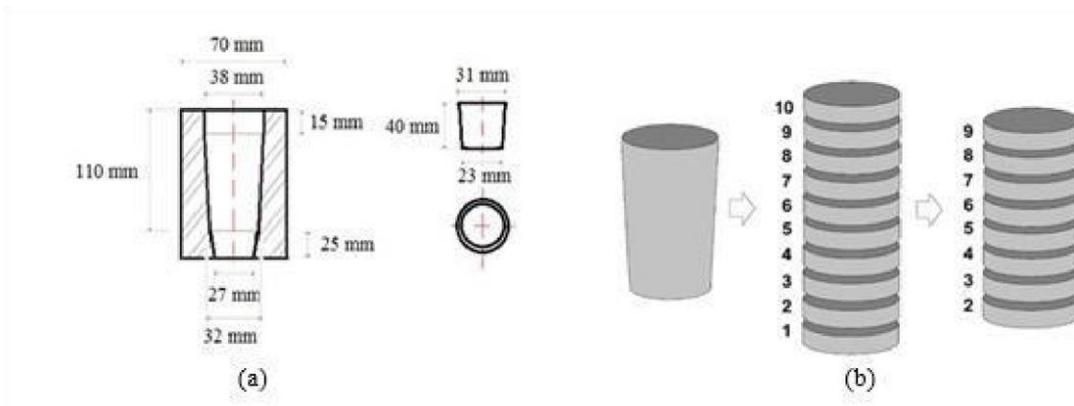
(a) Dimensions of the ingot; (b) Schematic of ingot cuts.
